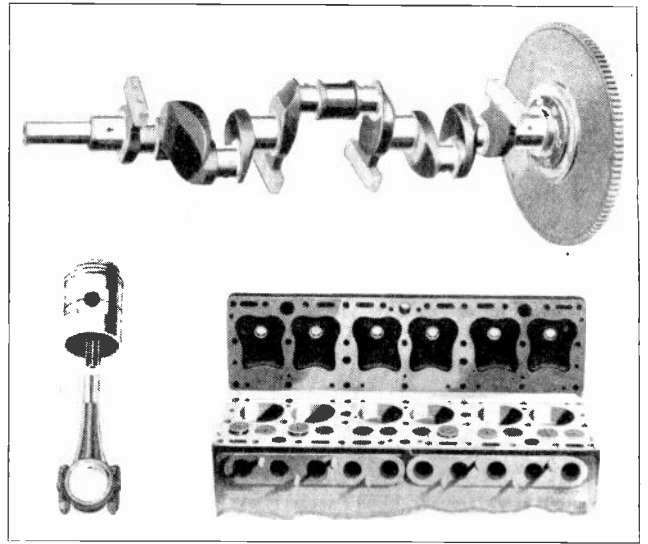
At the top of this figure is shown a crank shaft and flywheel for a modern six-cylinder engine, and below are shown a piston and connecting rod and the cylinder block with the head lifted to show the cylinders, valves, etc. Courtesy Oldsmobile Mfg. Co.
